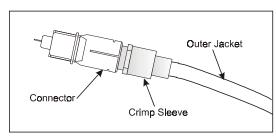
Install Crimp Sleeve (Single-Fiber Cable)
